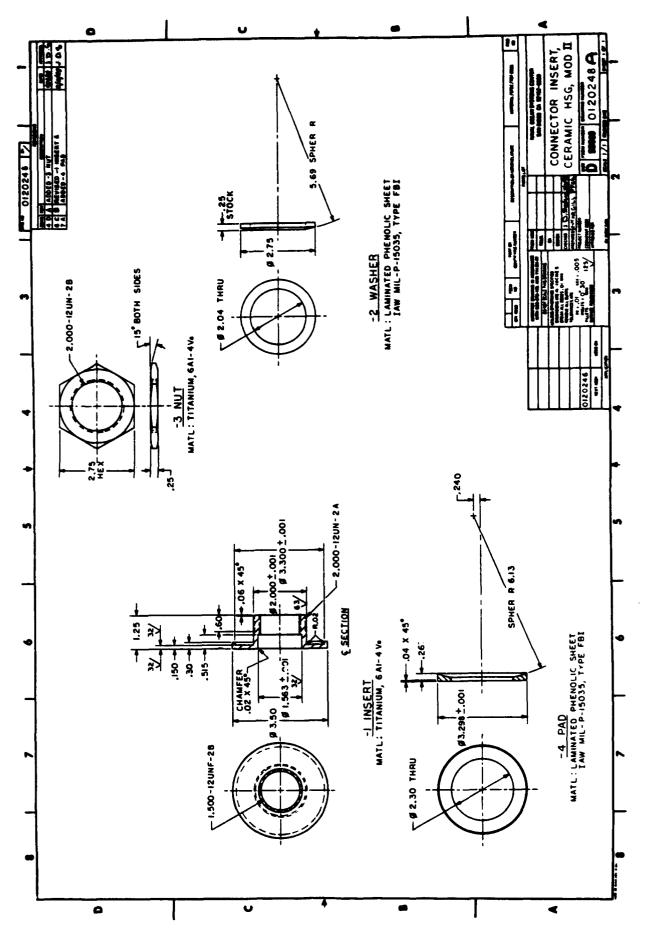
Improved connector insert (Revision A for Mod 2 hemisphere) after incorporation of phenotic bearing ped.
